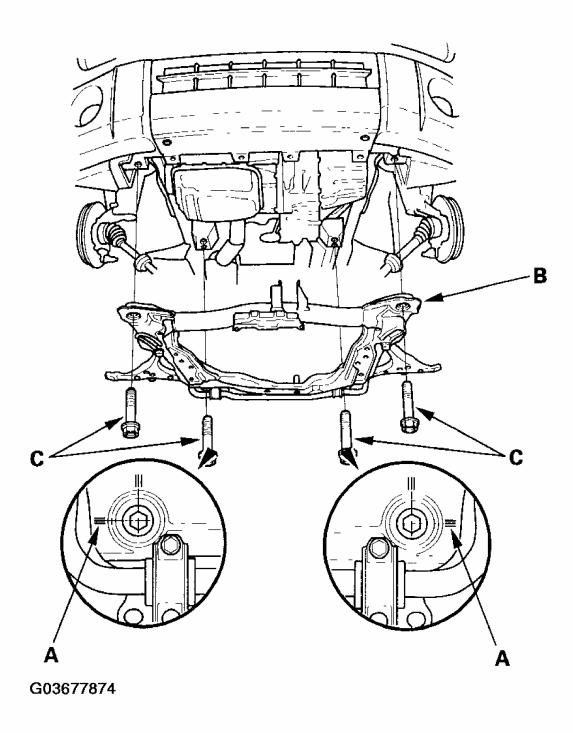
Removing Front Subframe Courtesy of AMERICAN HONDA MOTOR CO., INC.
